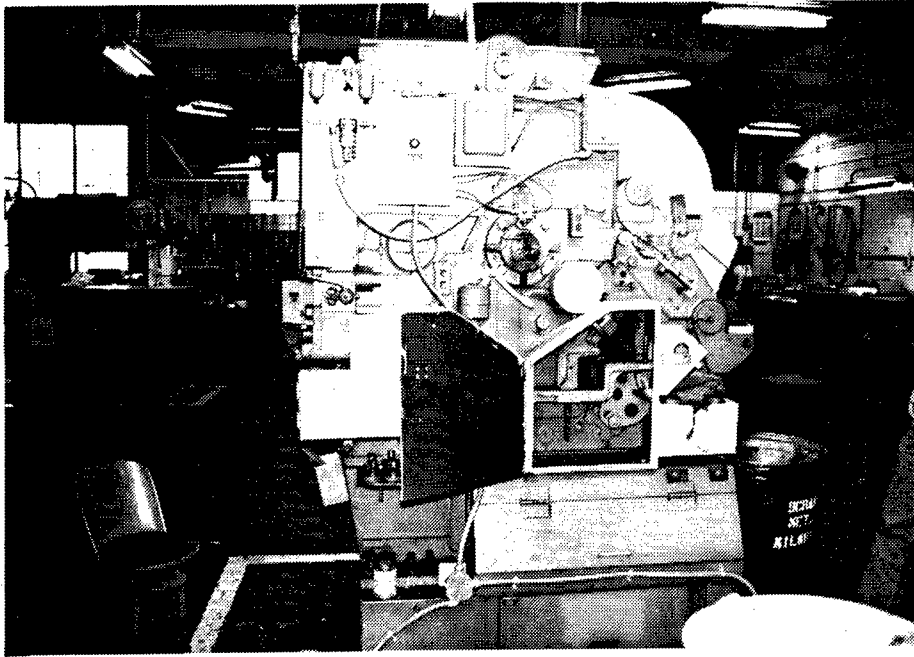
Building 500: An iron worker manufactured by Buffalo Machinery, Buffalo, New York, located in the Mill Right Shop.
